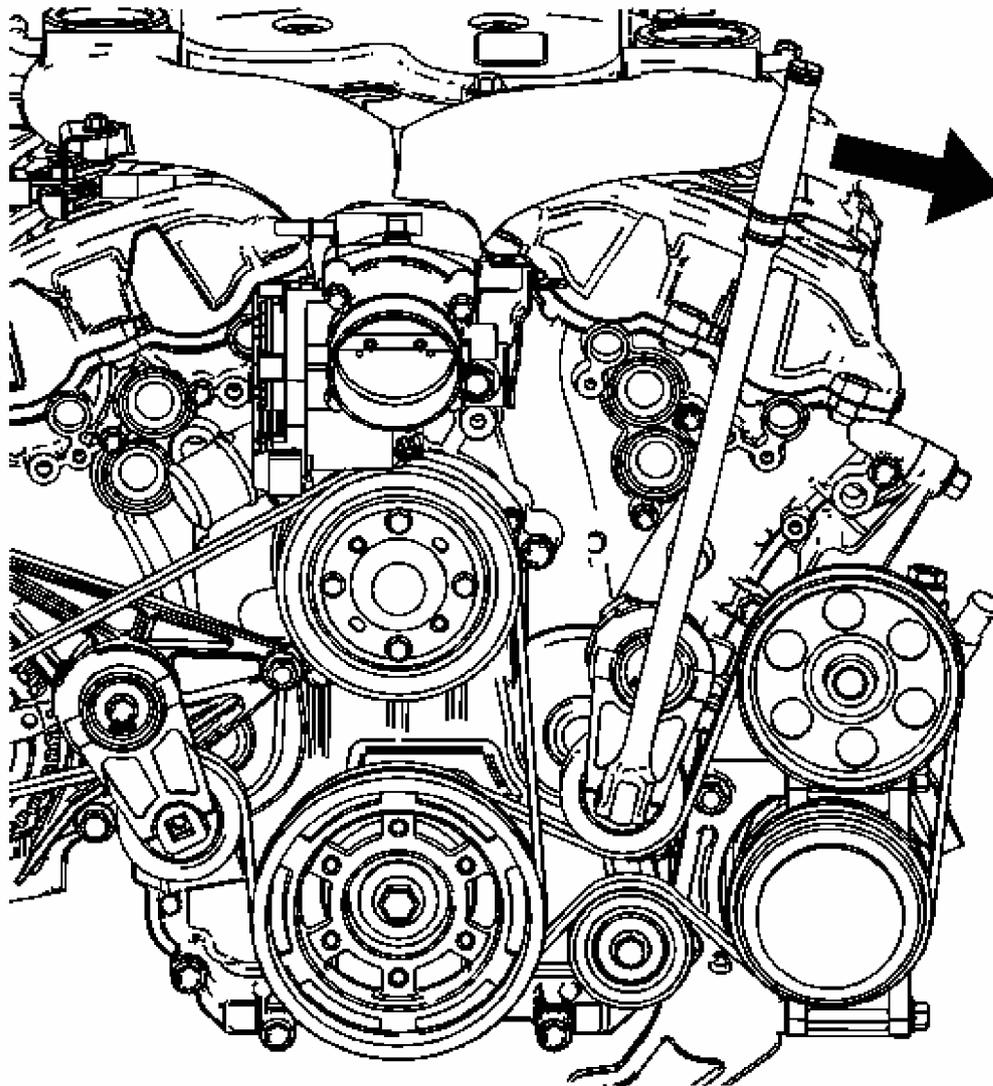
Removing/Installing Power Steering & A/C Drive Belt
